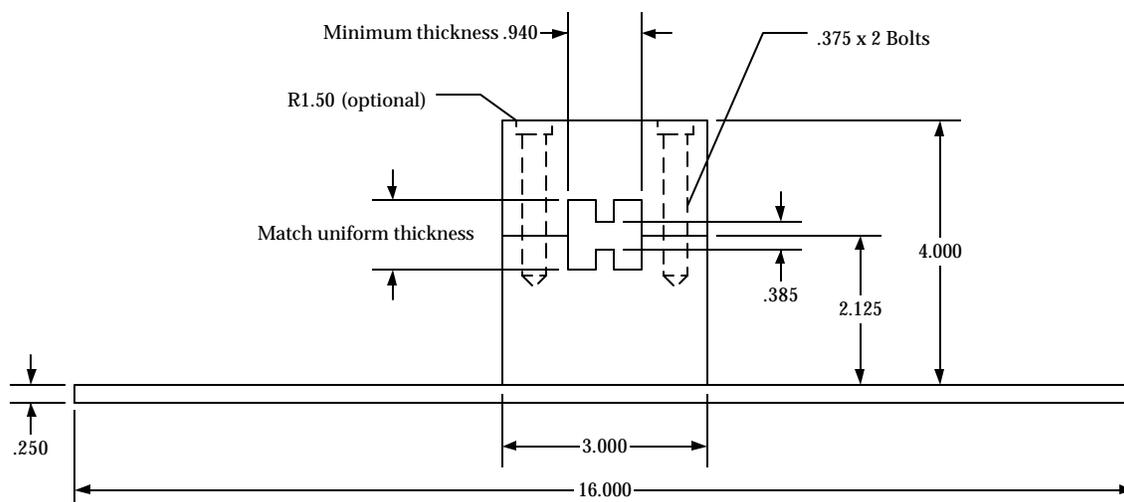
Schematic Showing the Machining of the Fixation Blocks Allowing Insertion of the Machined Handle (Dimensions in Inches).
